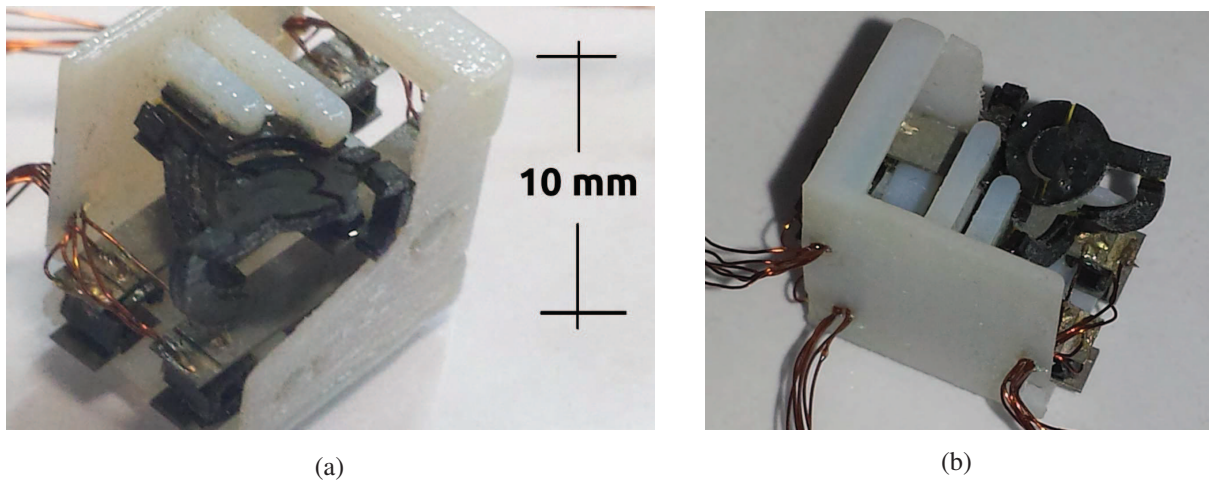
(a) Fabricated and assembled Micro Agile-Eye microrobot. (b) Other view of the Micro Agile-Eye.
